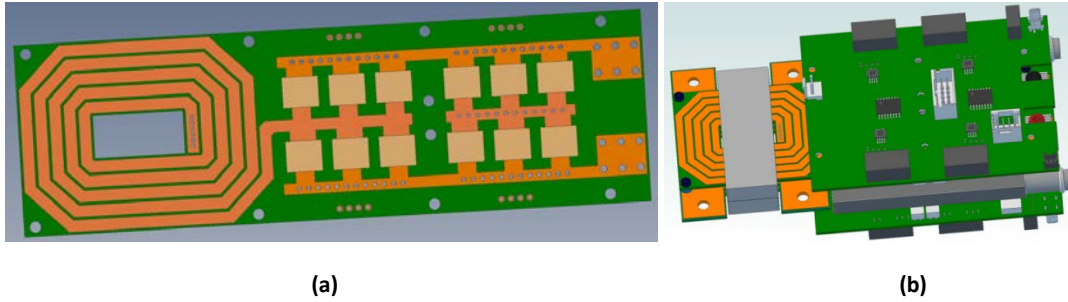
Final design for the 6.6 kW GaN-based three-port isolation converter: (a) PCB for planar transformer winding and GaN power plane board and (b) complete assembly.
